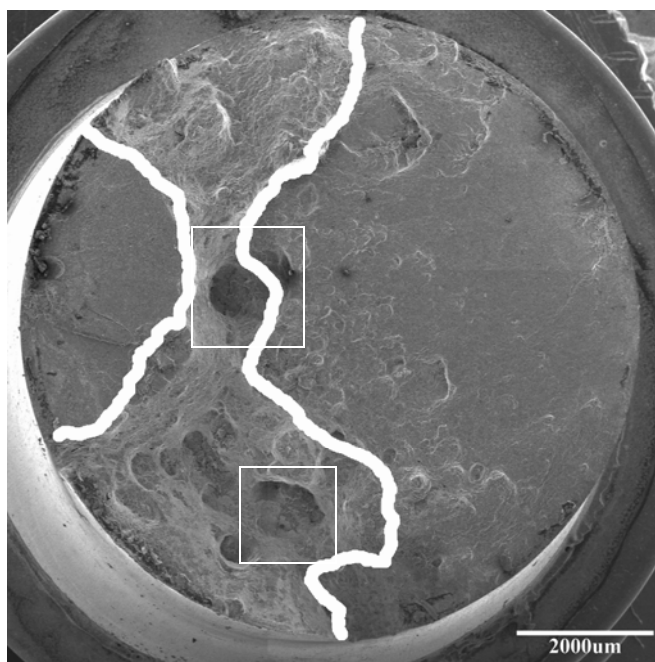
Fracture Regions Divided by Inserted Lines and Two Major Pores Boxed on a Cylinder with Disc Specimen, $S_a=392$ MPa (Specimen H5)
